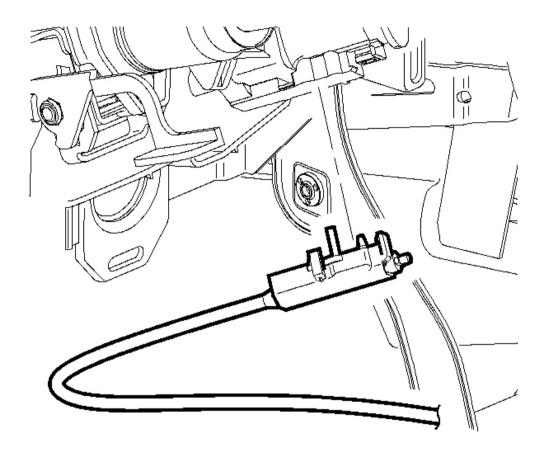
Park Lock Cable Assembly & Ignition Module Courtesy of GENERAL MOTORS CORP.
